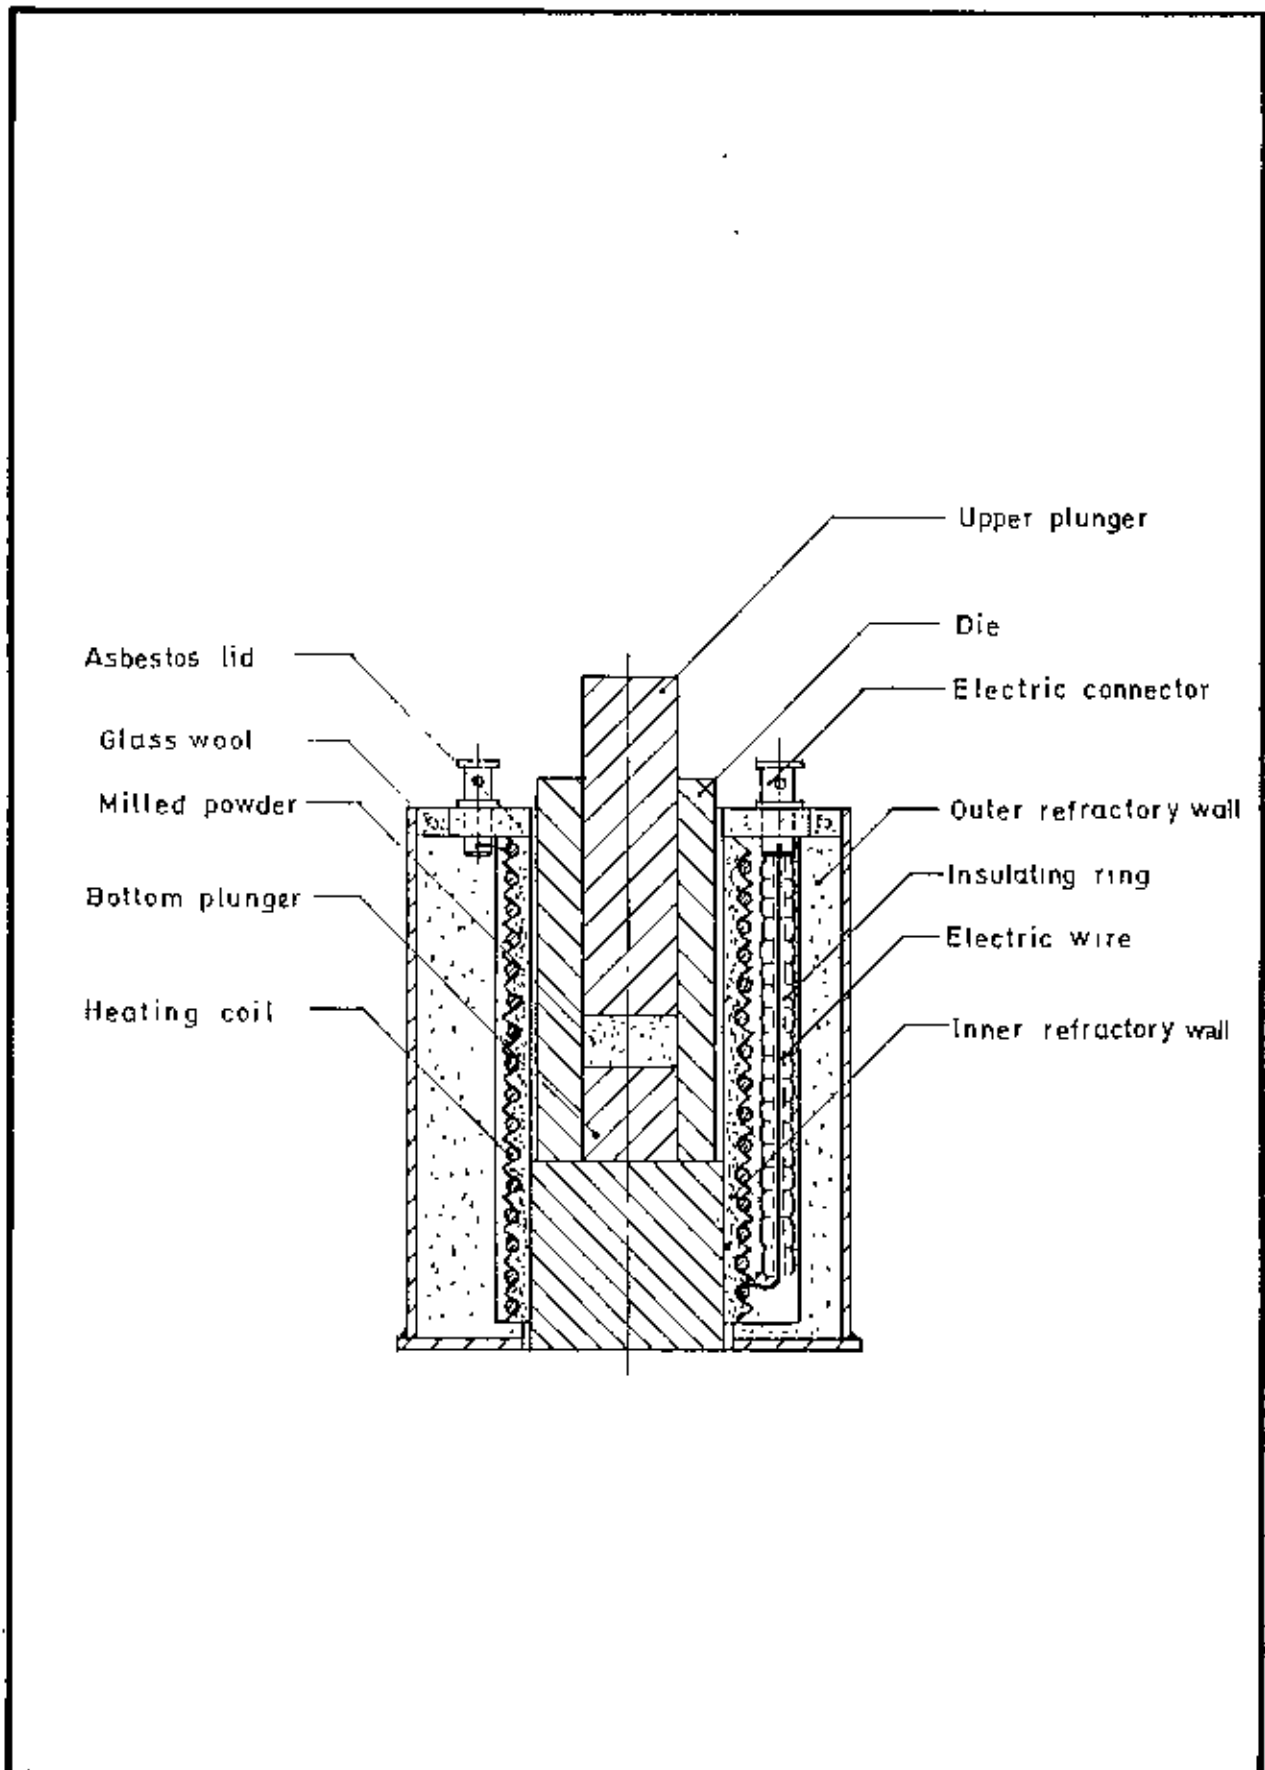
HOT PROCESSING DIE AND FURNACE ASSEMBLY
